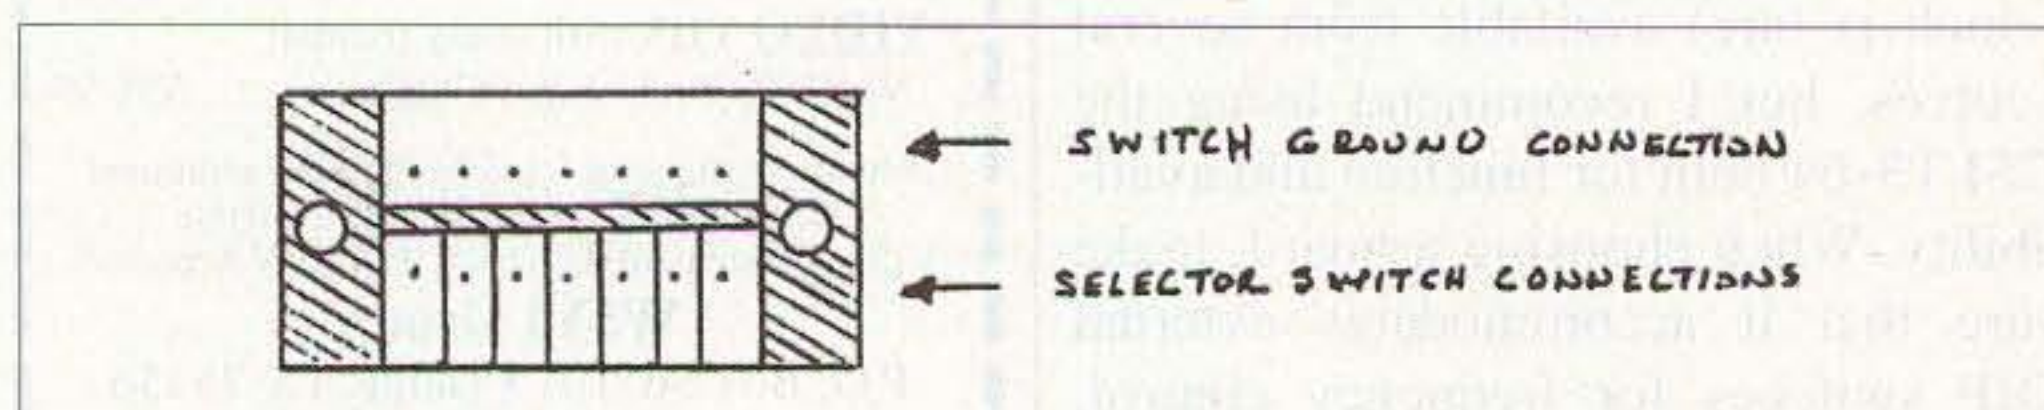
Suggested board layout for mounting a 14-pin DIP switch socket. Only 12 of the 14 pins are used.
